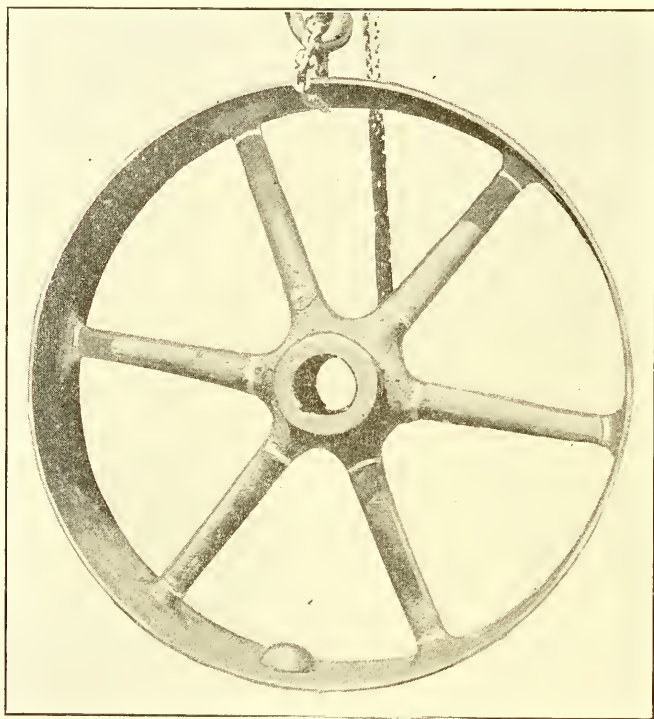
A Large Pulley Welded in Twelve Places.
